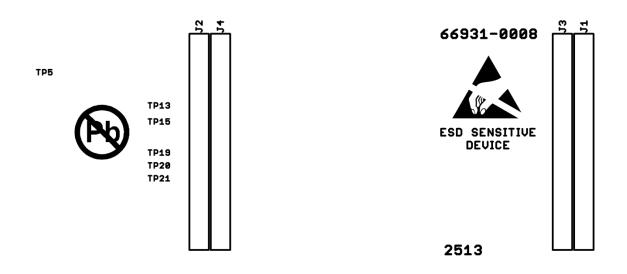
PCB Layout Bottom Silkscreen Mirror Image
